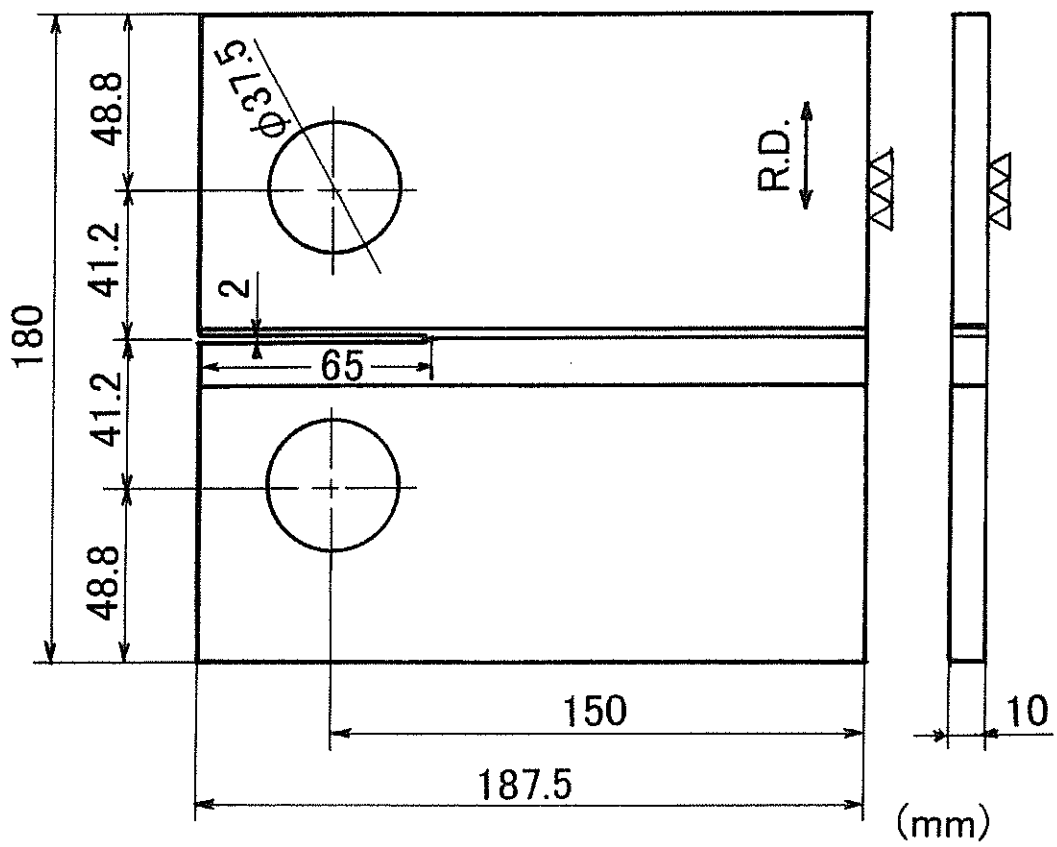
Shape and size of CT type specimen for fracture toughness test
